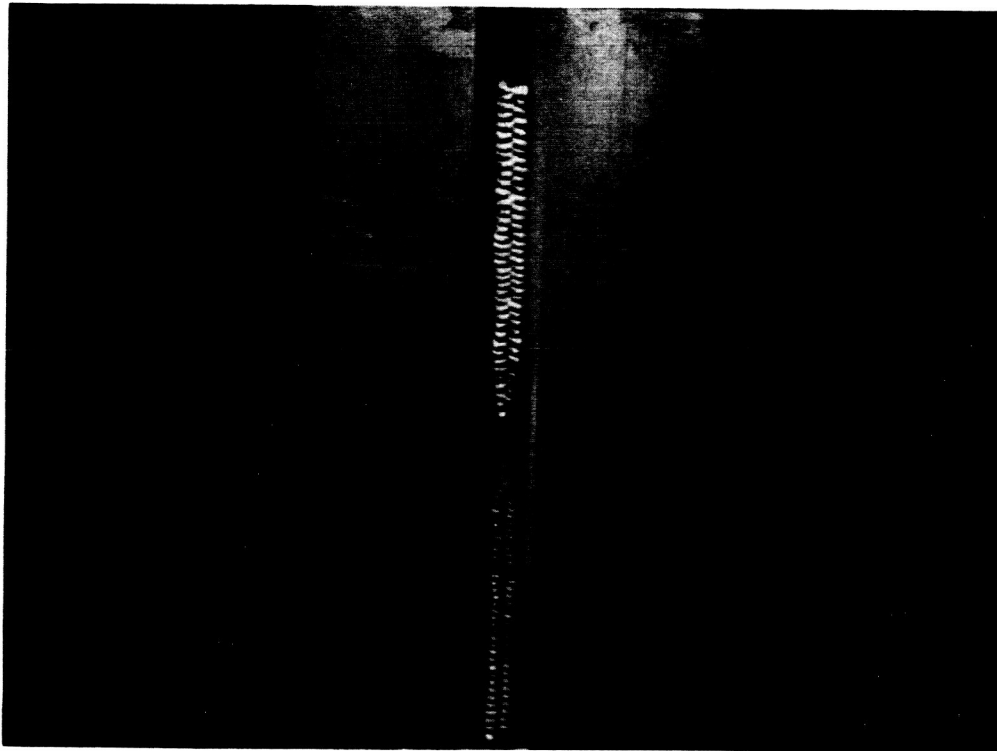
TYPICAL "ROPY" WELD,
